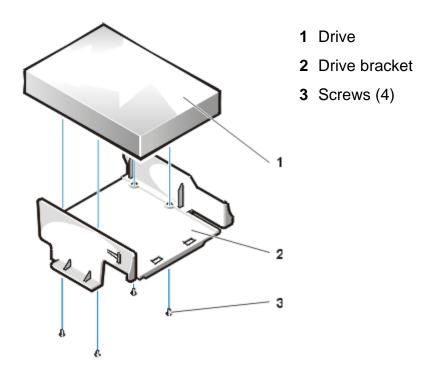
Removing the Hard-Disk Drive Bracket From the Small-Form-Factor Chassis
